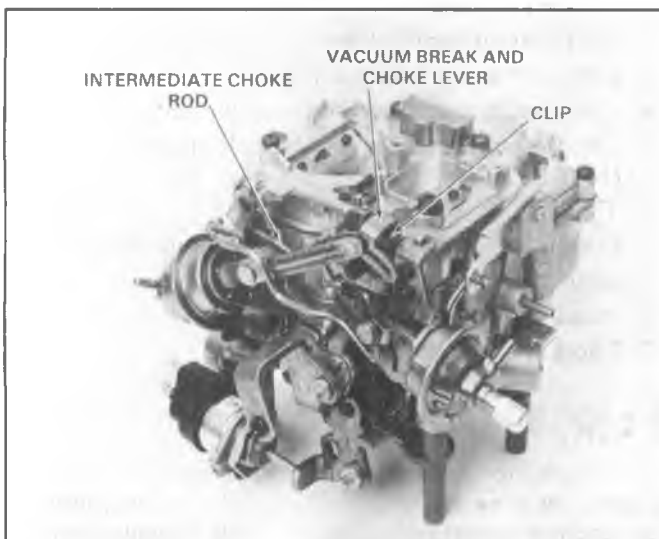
C2-3b--Vacuum Break and Idle Speed Solenoid
